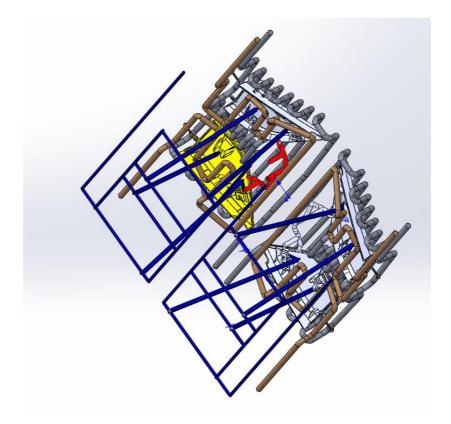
Core side of the mold. Blue - Double racks with cooling feature; Brown - Conformal channels from core side of the mold.
